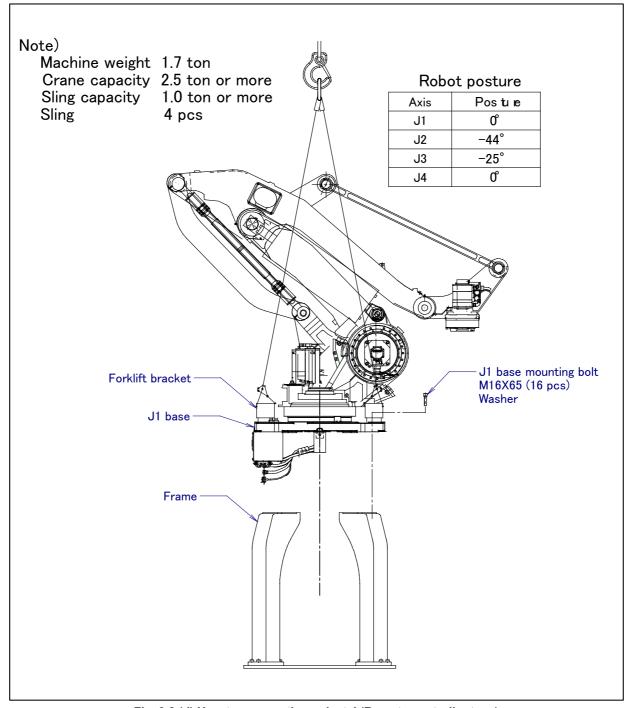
(d) How to remove the pedestal (Remote controller type)
